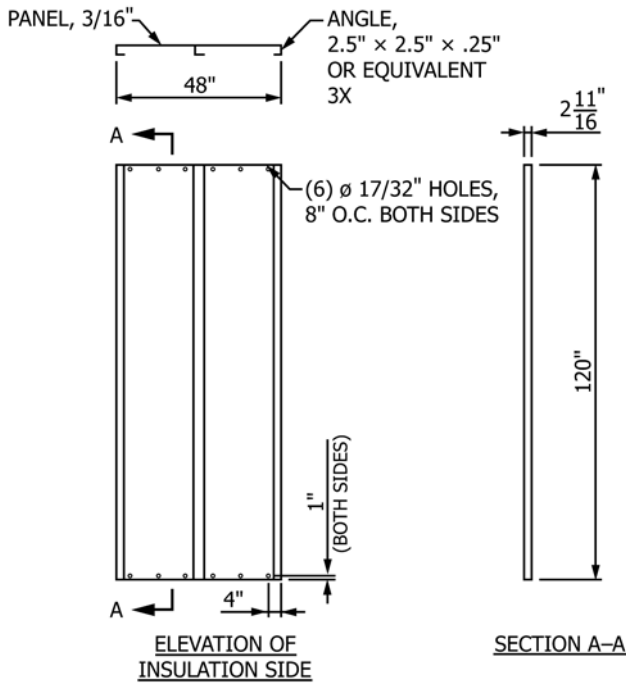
Steel Test Specimen Construction Details for A-Class Bulkhead
